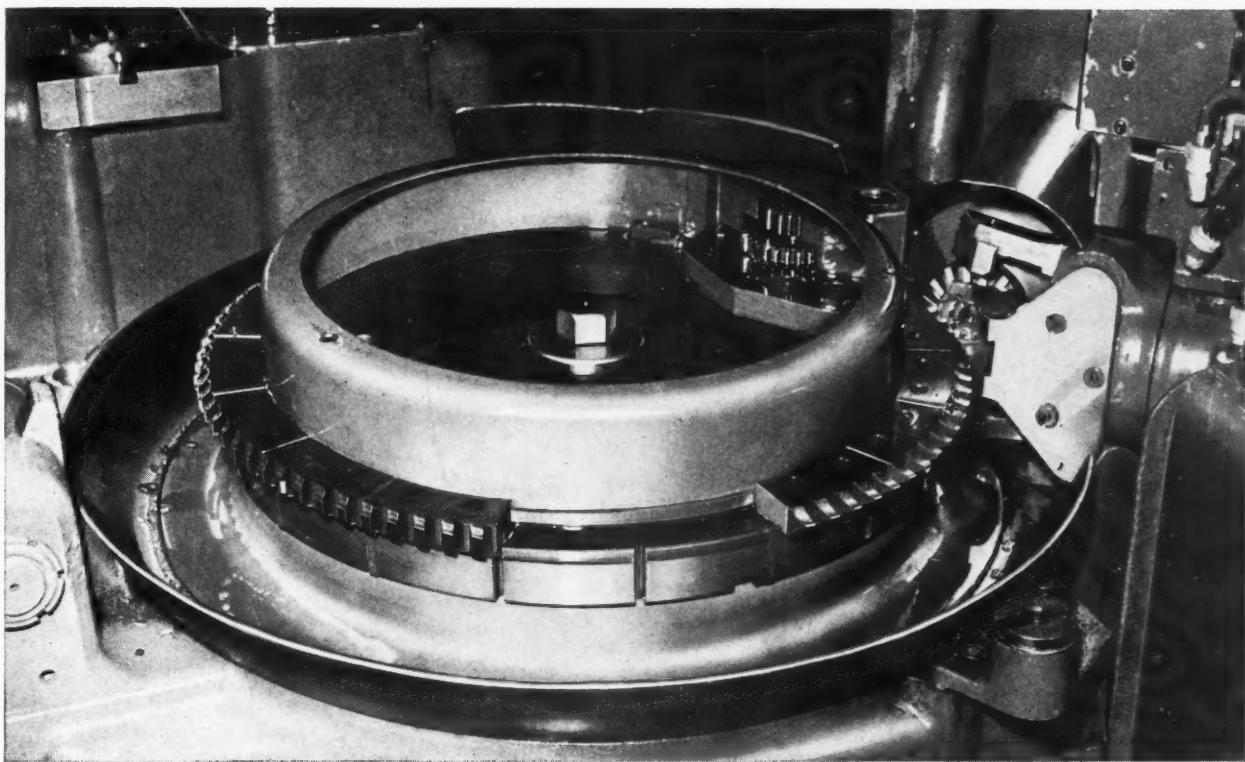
Close-up view of the Revacycle machine with the cutter cover removed. Finishing blades are seen in contact with the gear being machined, while roughing blades are at left
